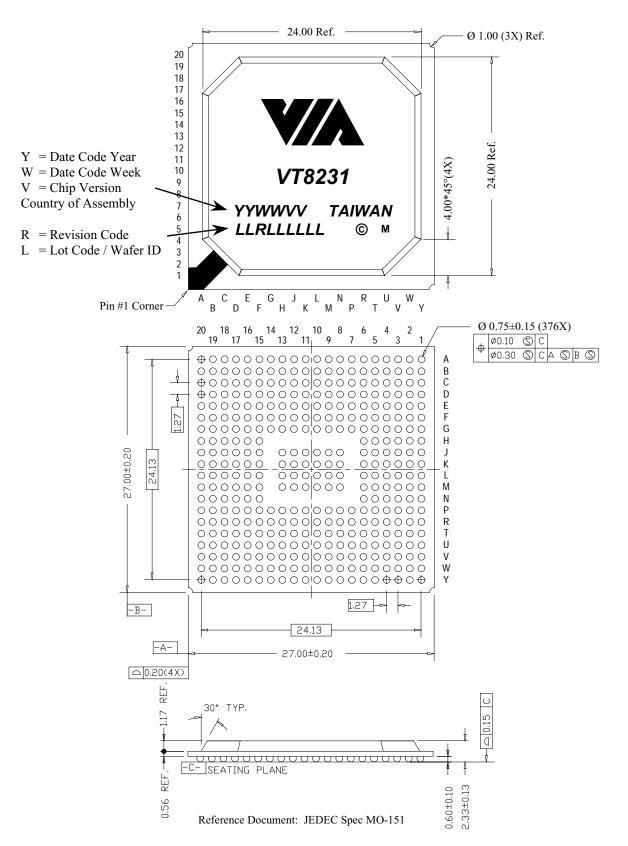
Mechanical Specifications – 376 Pin Ball Grid Array Package
